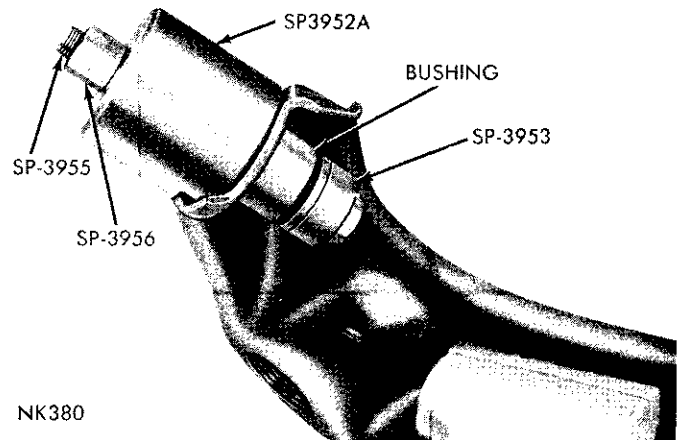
Removing Upper Control Arm Bushing (Chrysler)
